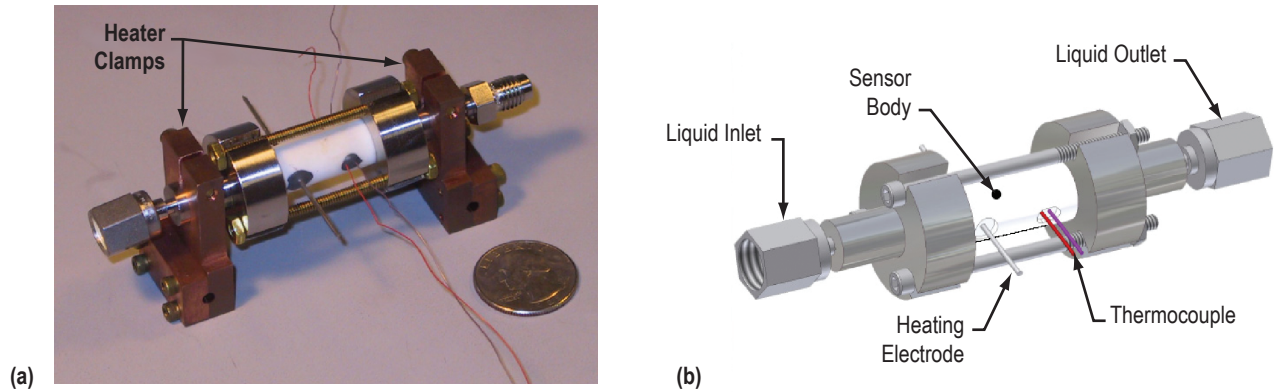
Assembled hot spot flow sensor assembly: (a) Photograph and (b) CAD drawing.
